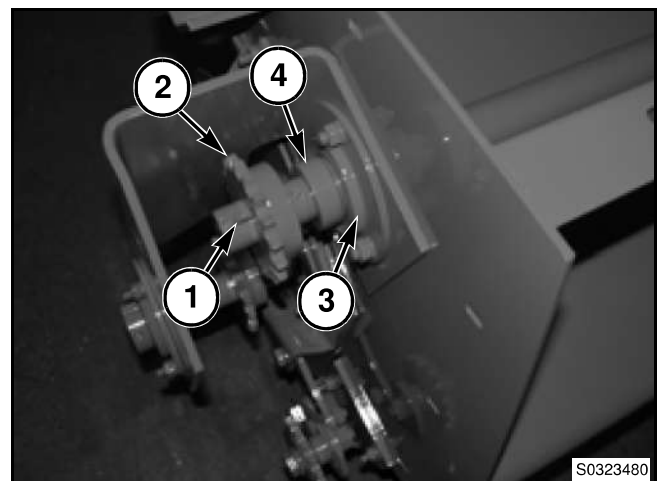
Punch the gib key (1) out then remove the sprocket (2).
